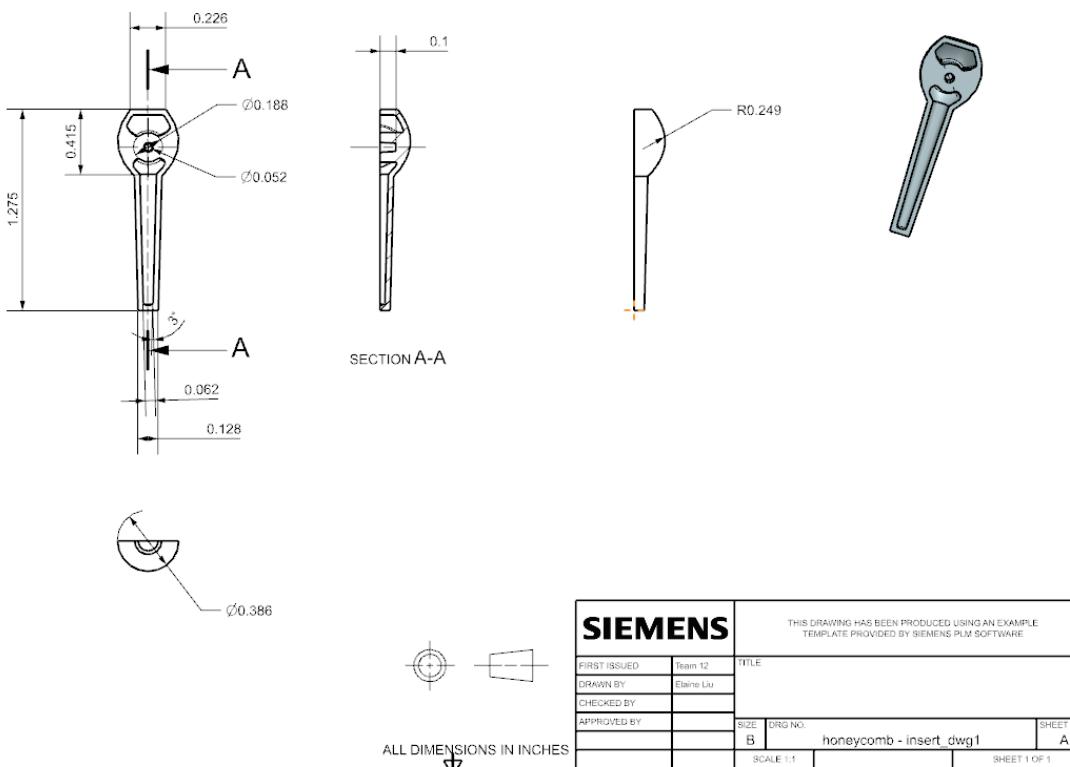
Dimensioned CAD Drawing of Lollipop with Insert
